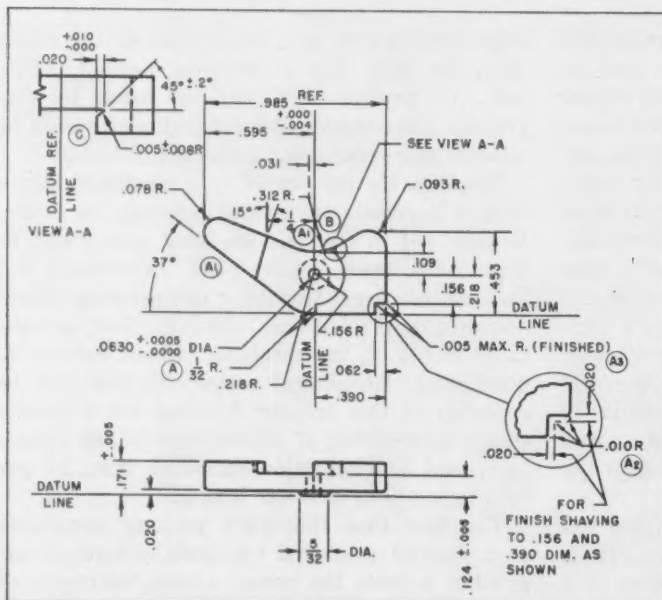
The close tolerances on the various surfaces of the tripper flywheel appear on this drawing.
